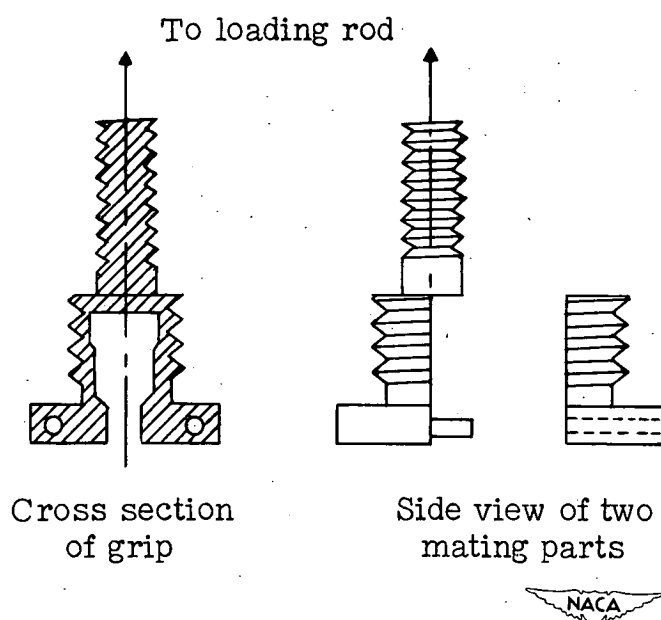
Specimen grips. Nut holding two parts together is not shown.
